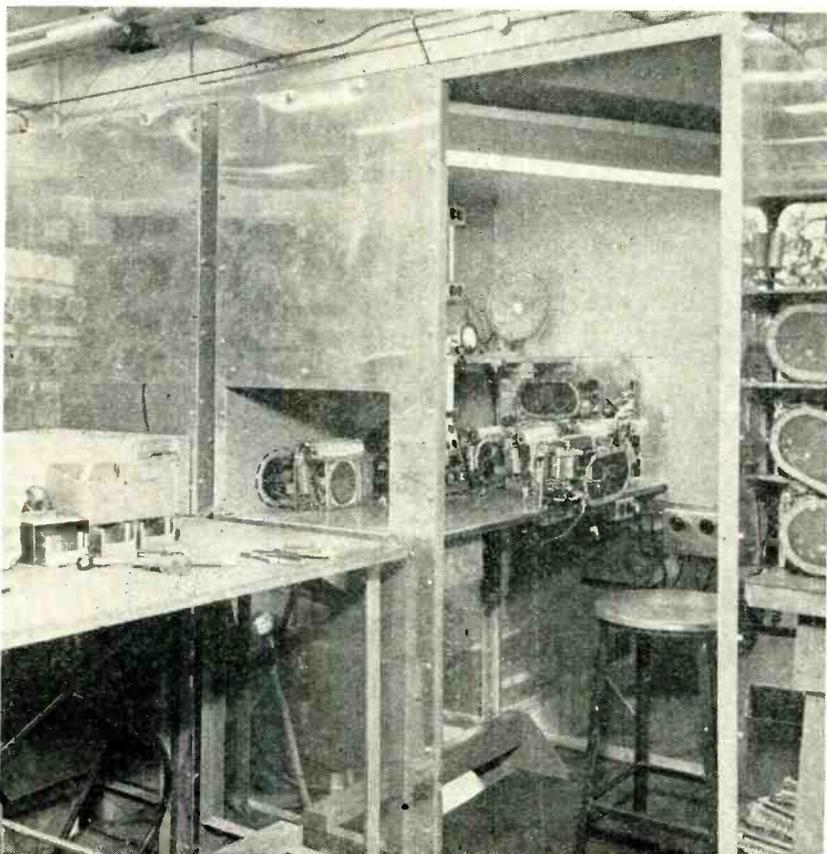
Shielded booth contains openings for passing through receiver chassis
